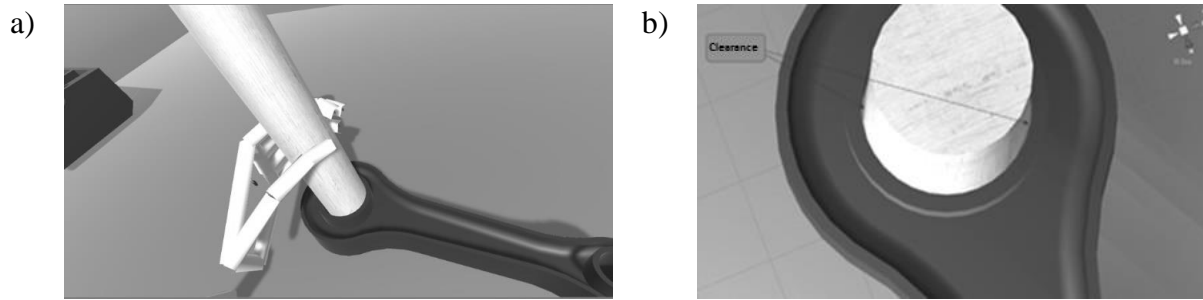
a) Impossible insertion, b) clearance between the peg and the hole.
